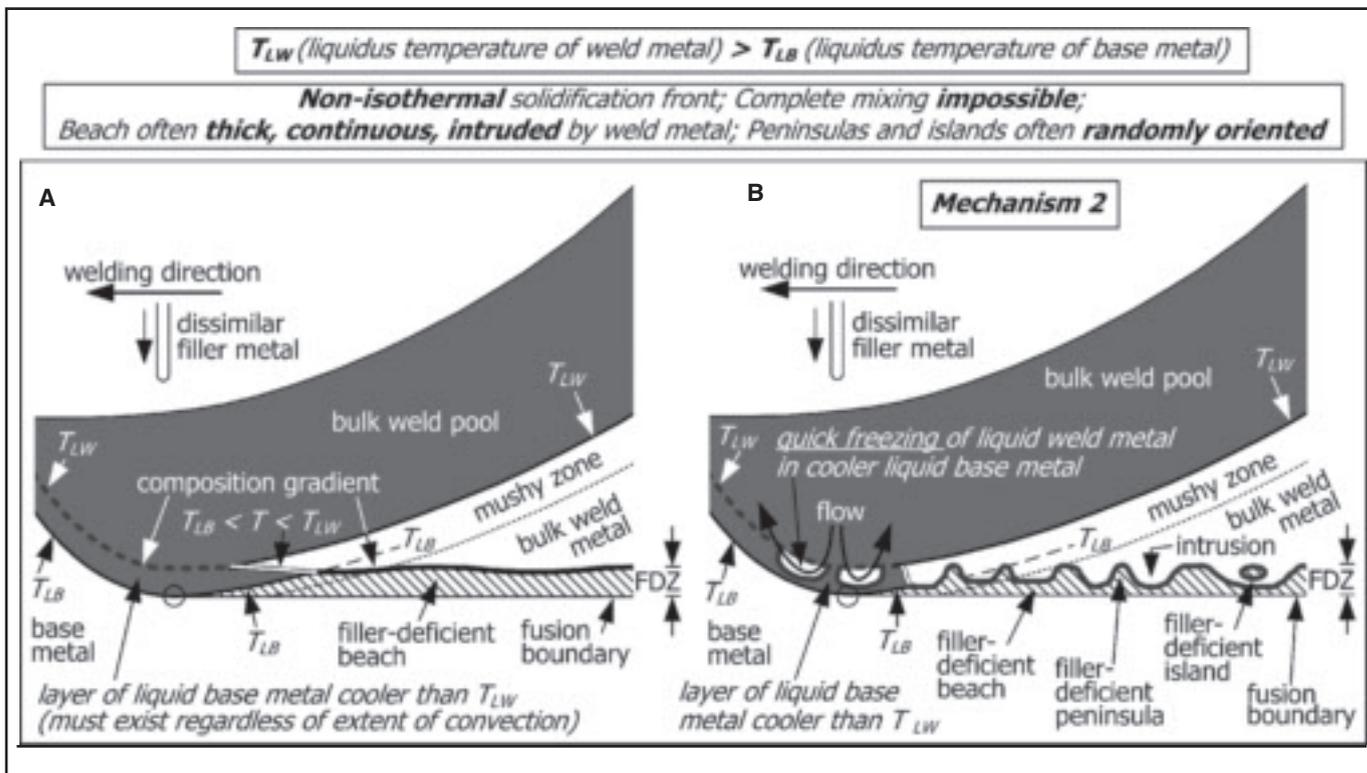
Formation of fusion-boundary macrosegregation (filler-deficient zone FDZ) when filler metal makes $T_{LW} > T_{LB}$: A — beach; B — weld-metal intrusions, beach, peninsulas, and islands by Mechanism 2. Pool boundary is melting front before circle and solidification front after.
